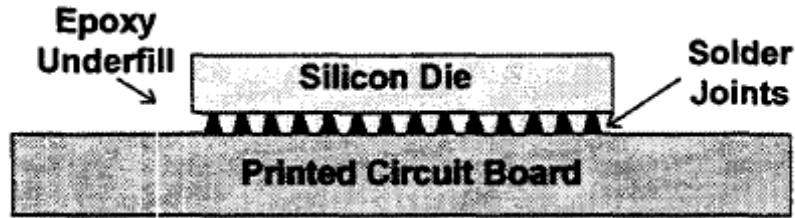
Schematic of FCOB Assembly using solder joint columns
